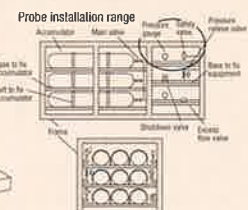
Example of installation at Piping Module of Accumulators, etc.
